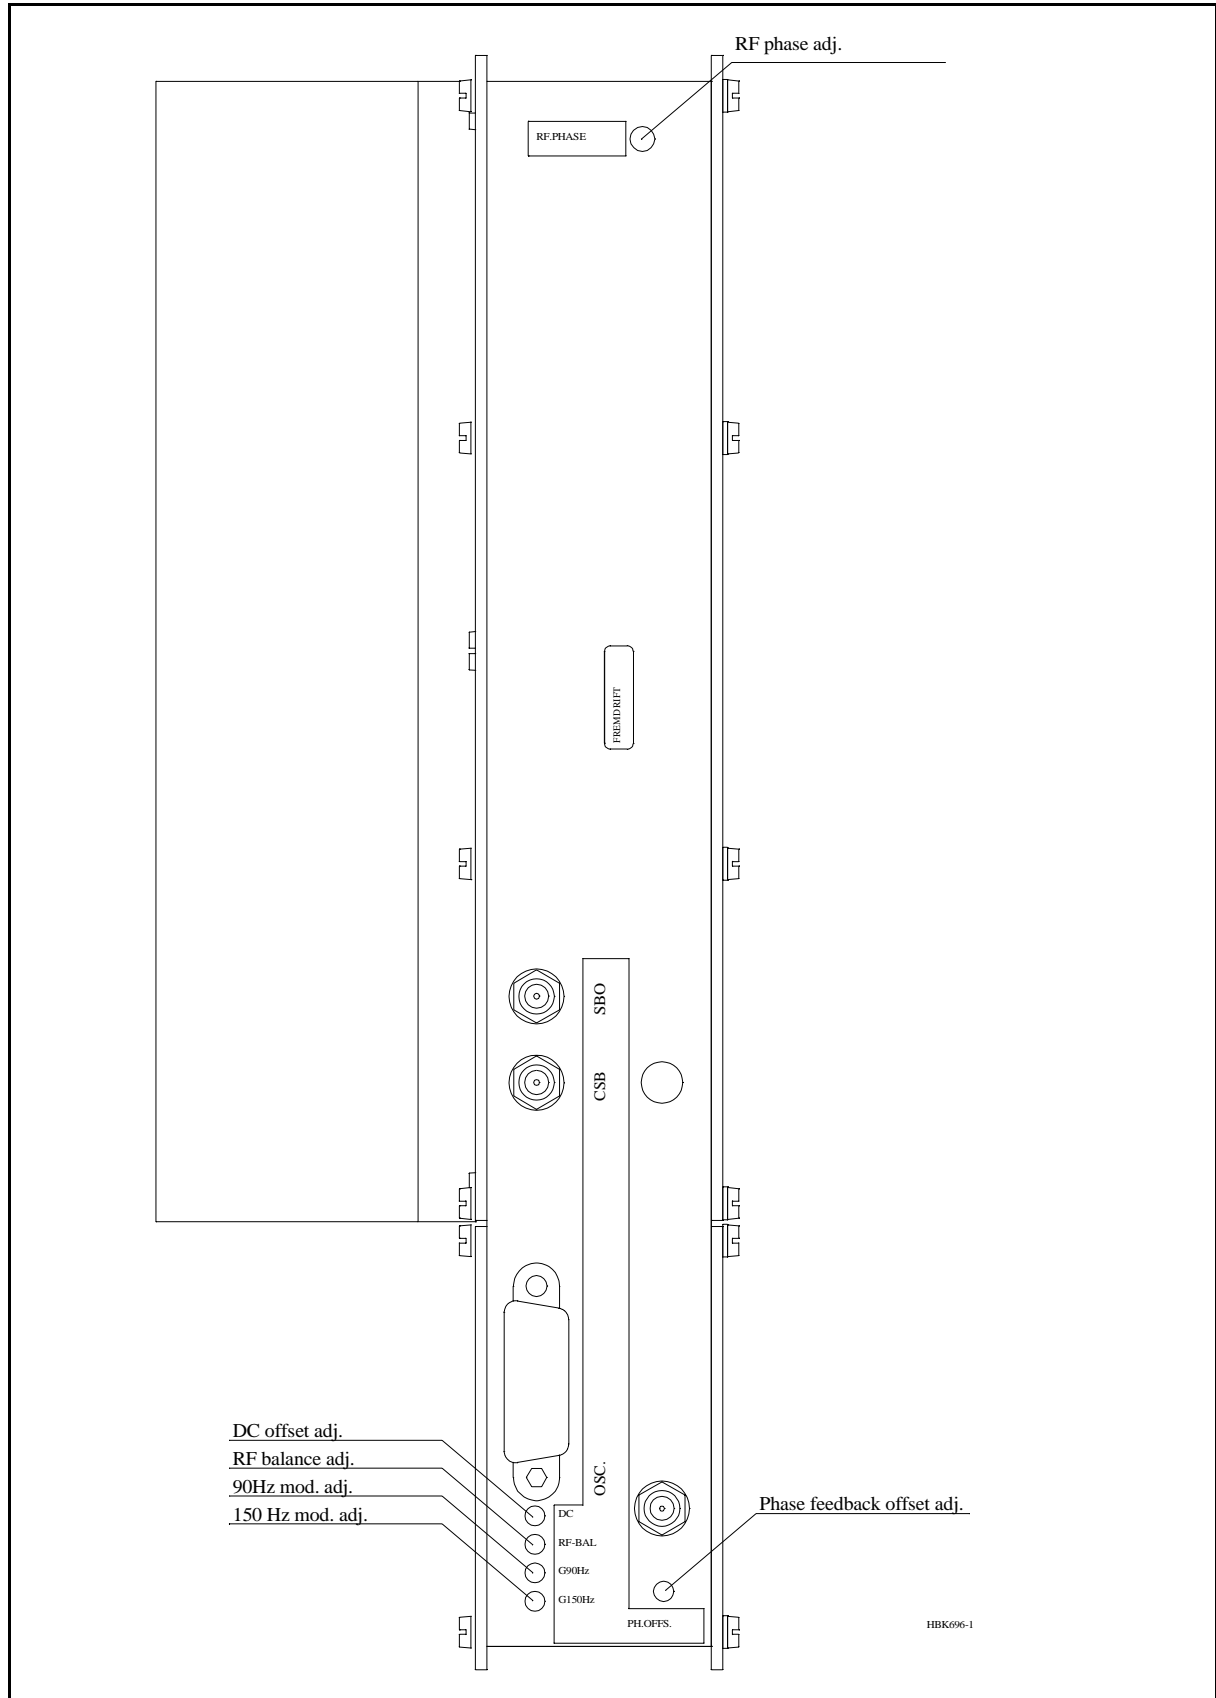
Power Amplifier Assembly adjustment points (rear view).
